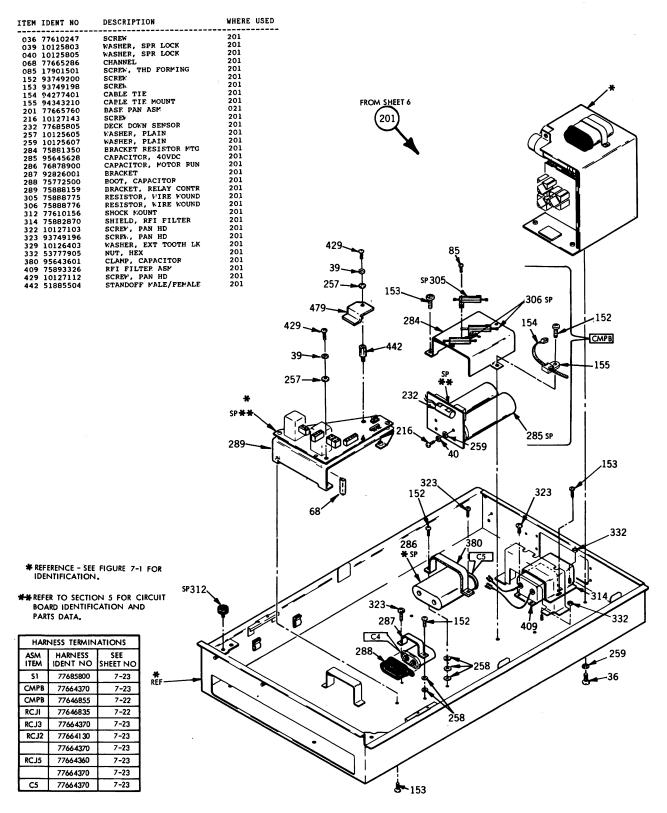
BASE PAN ASSEMBLY (SHEET 2 of 2)
